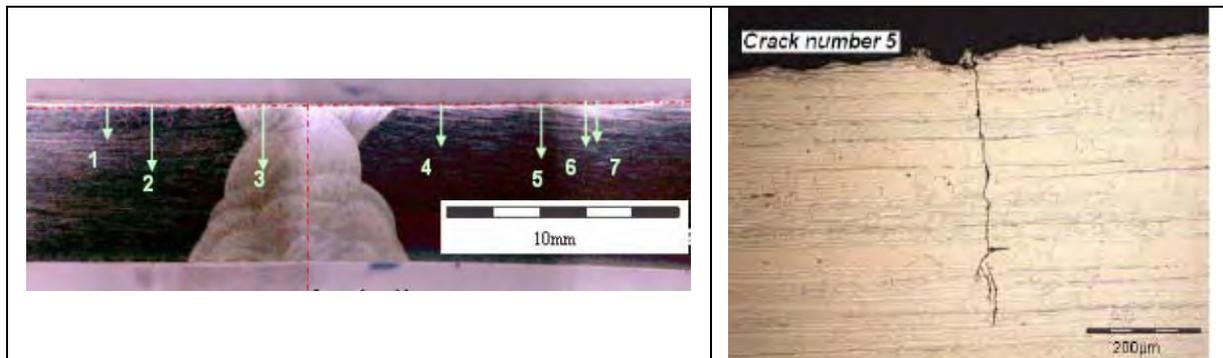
Cracks in the flushed and ground weld S3	Fig. 11b: Crack 5 (flushed & ground weld S3)
